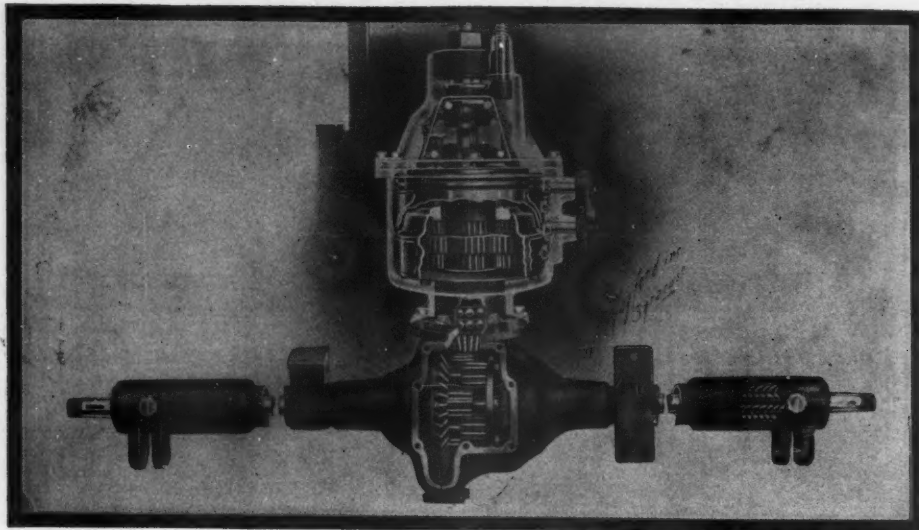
LEFEVER ARMS CO.'S PLANETARY GEARSET AND JACKSHAFT
